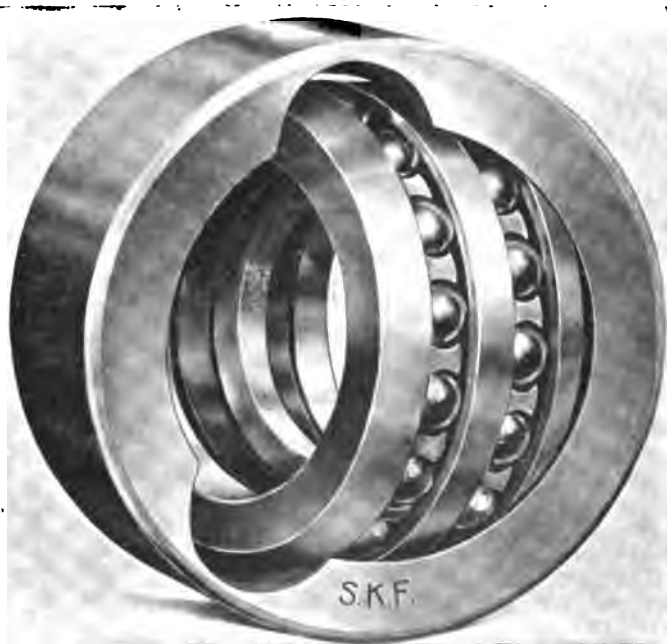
SEC. 7b.—Deflected view of ball thrust bearing.
